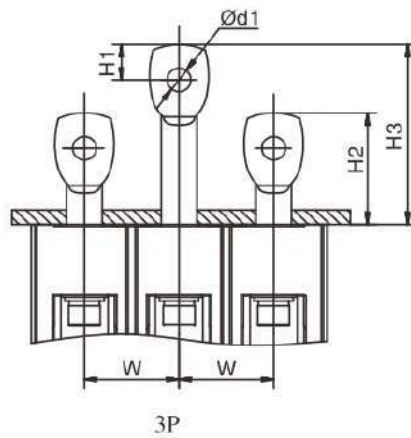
Back board wiring shape and installation size of EXM3-250, 400, 630, 800
